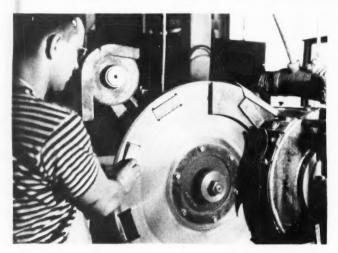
View of operator placing side plates on feed wheel of Besly surface grinder.
